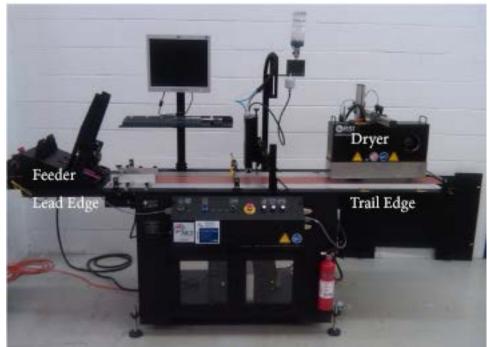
Completed Install of 530 Base with Feeder and Dryer
